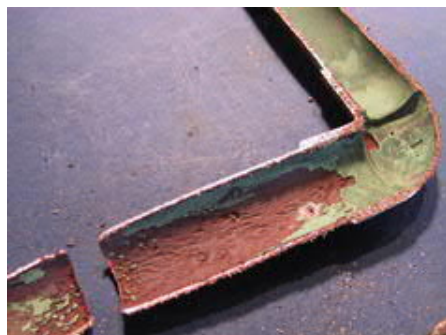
EXAMPLE OF PIPING STRUCTURE WITH ELBOWS SUBJECT TO EROSION
